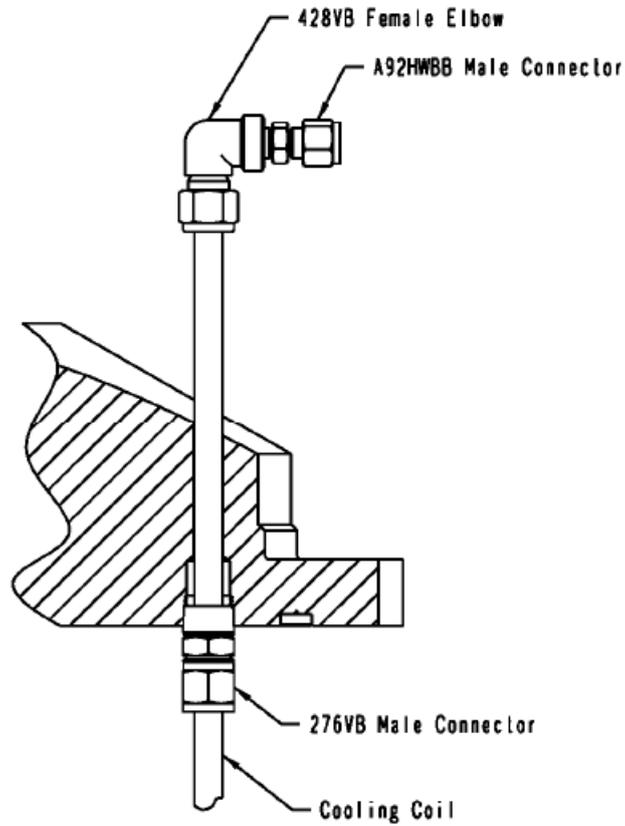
Welding of cooling coil on head of the hydrothermal reactor
